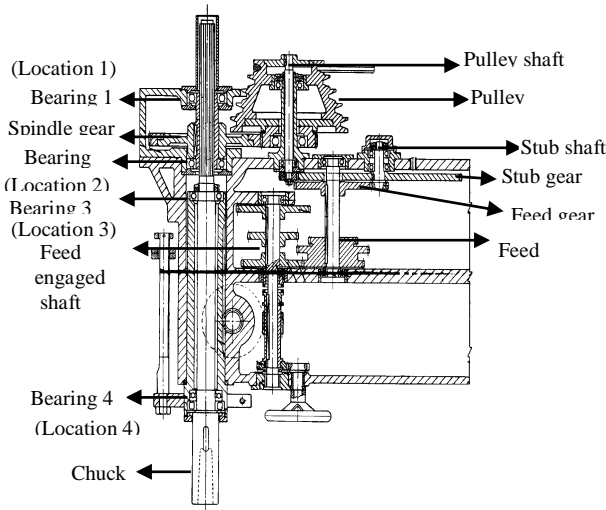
Main Drive Assembly with Location of Spindle Bearings
